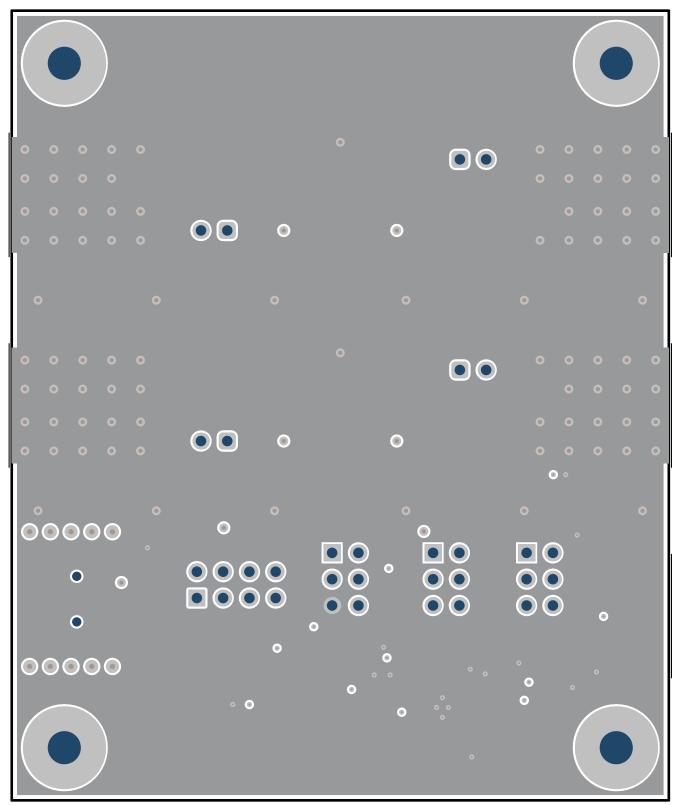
PCB Layout Example From CDC6 EVM - GND Layer
